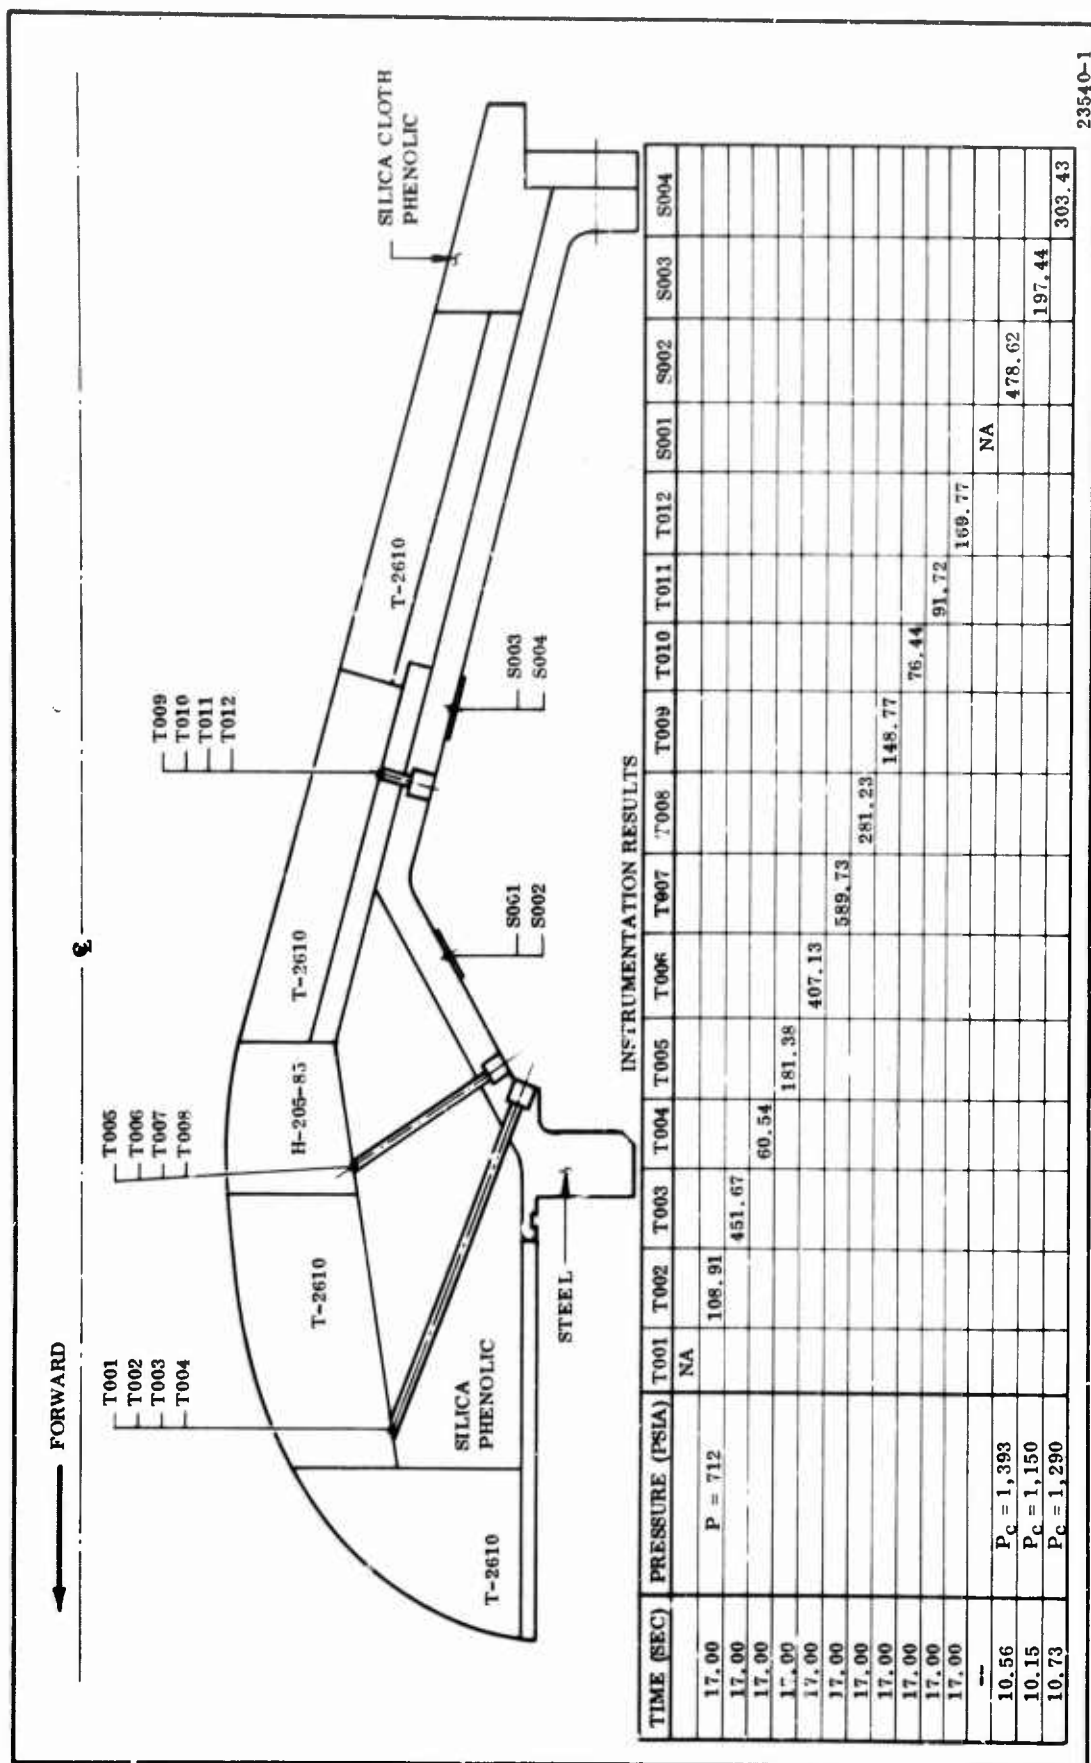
Maximum Instrumentation Readings, Nozzle No. 6
